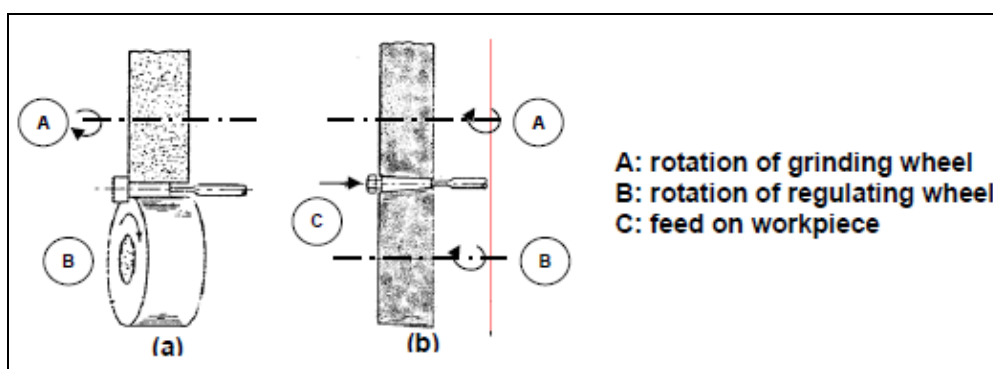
Center less (a) In feed; (b) End feed grinding
